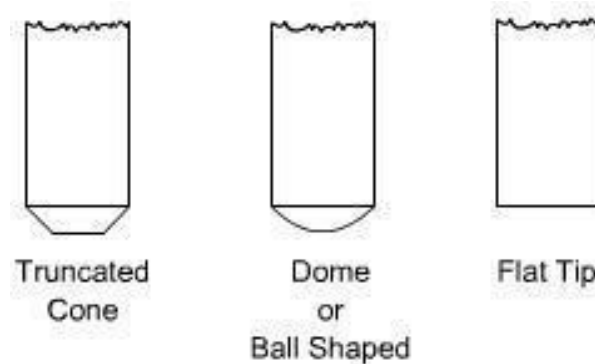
Electrode Shapes for Spot Welding
